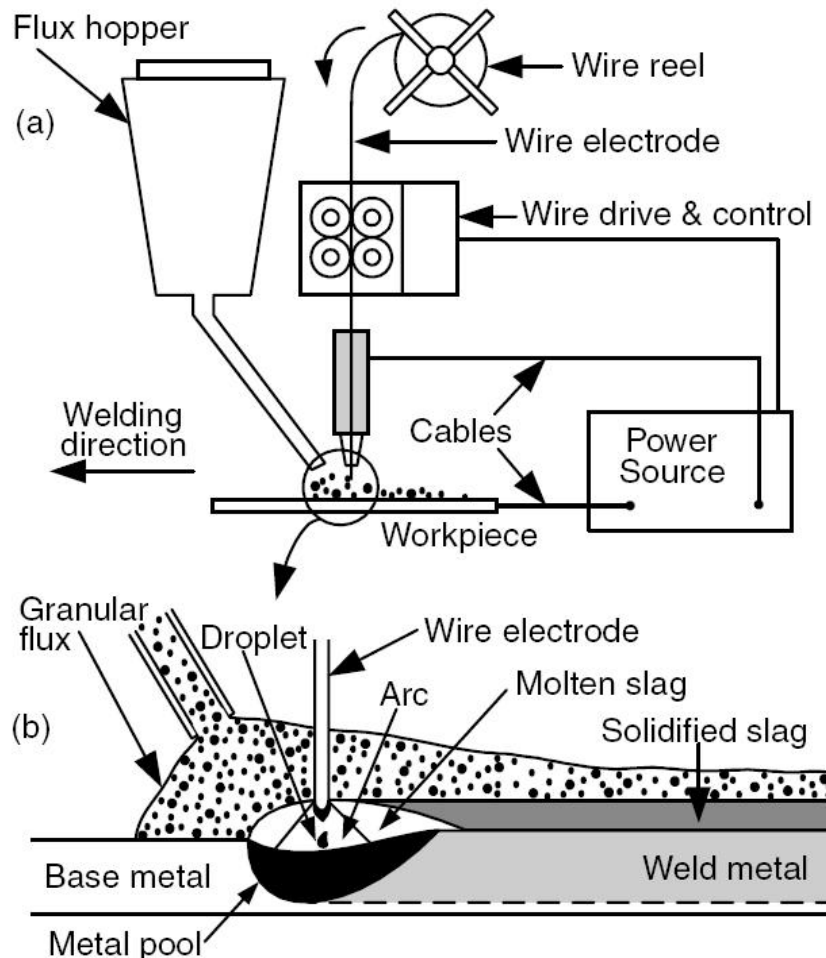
Submerged Arc Welding Process a) Overall Process and b) Welding area [6]
